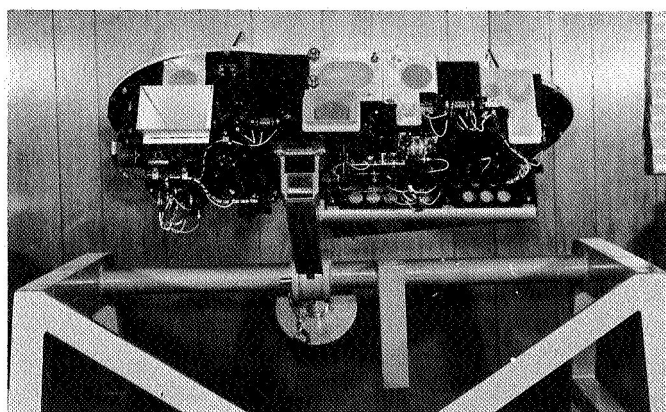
Back of radiometer assembly ready for installation of thermal control cover
